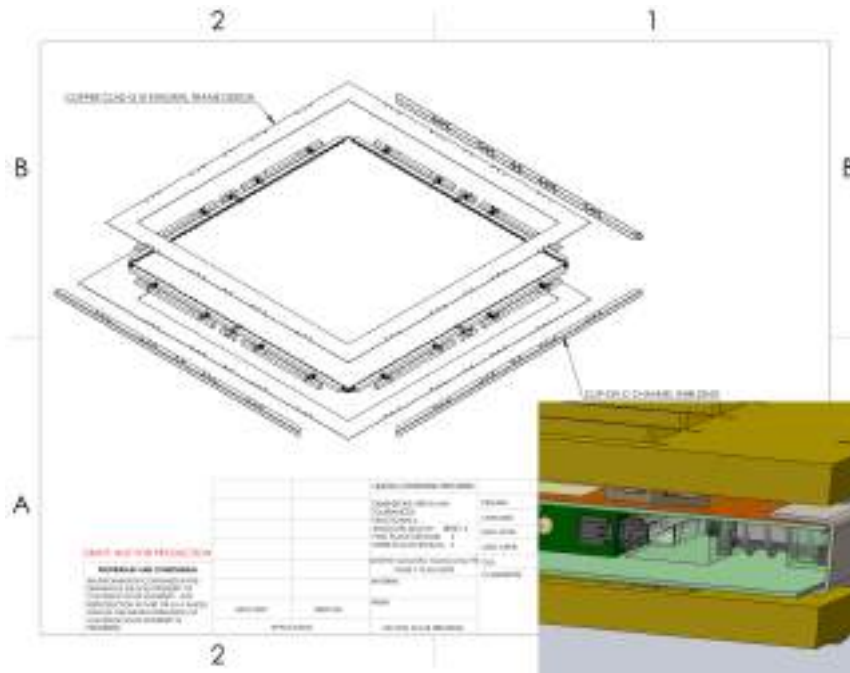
Copper-clad G-10 frames and formed stainless-steel external covers provide a 3-sided discharge shield for SiPMs.
